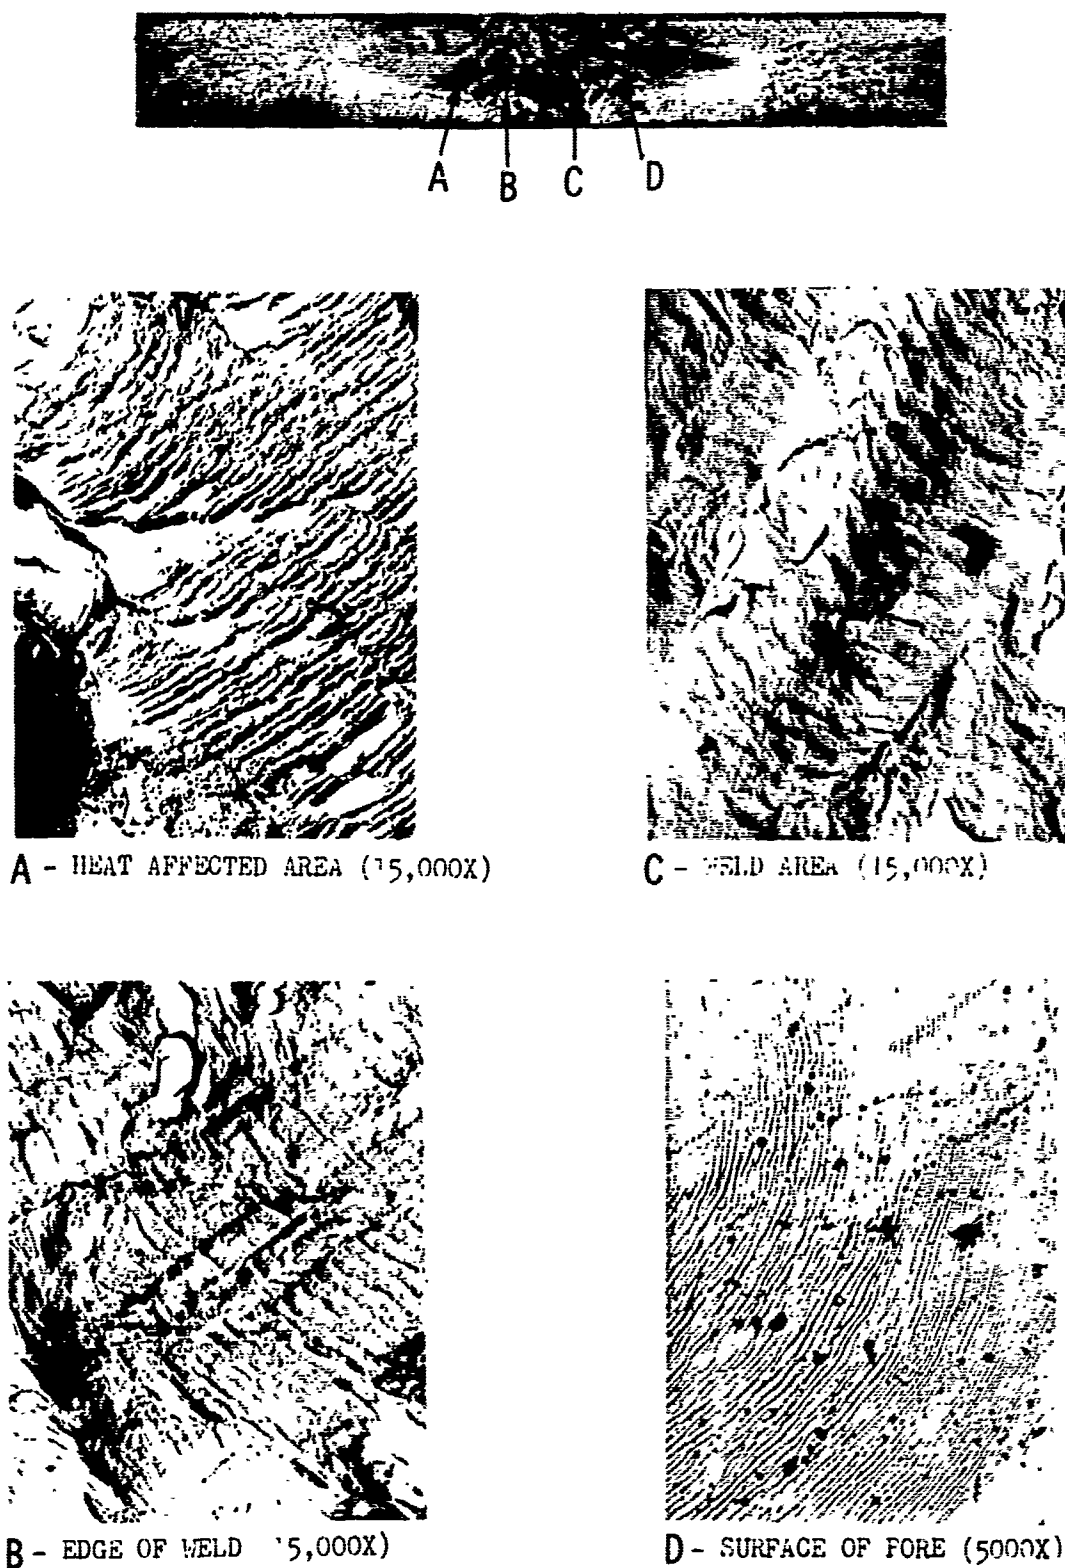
Electron Fractographs of As-Welded Ti-6Al-4V Fatigue Specimen 6T-22
